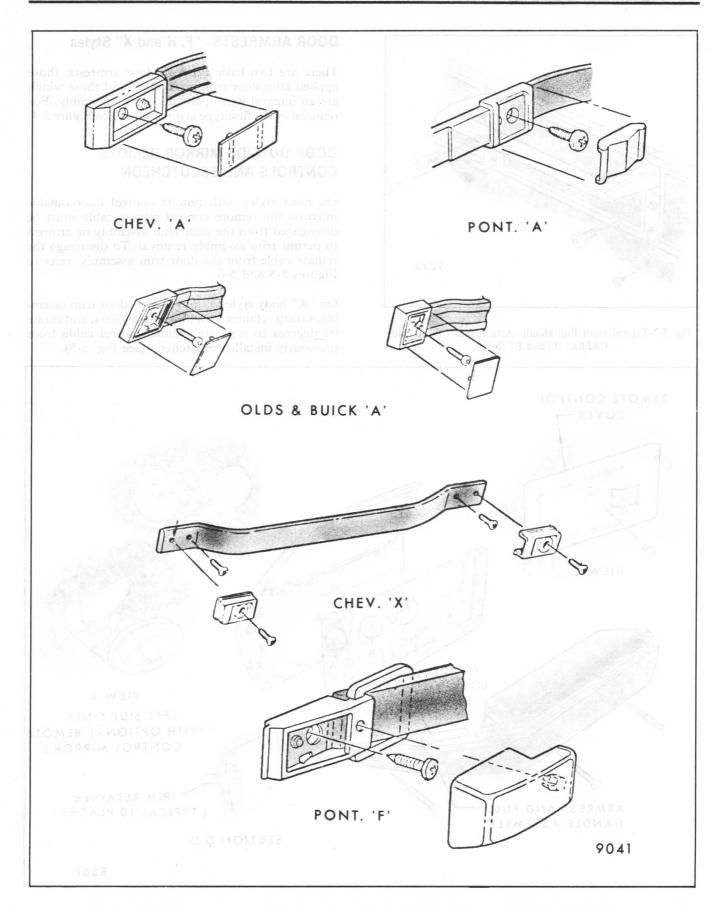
Typical Door Pull Handle Attachment - "A, F and X" Styles
